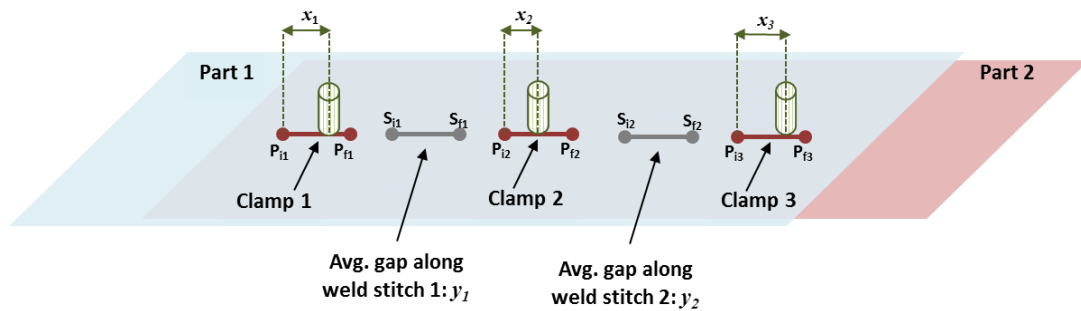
Clamp layout of sheet metal assembly for welding
